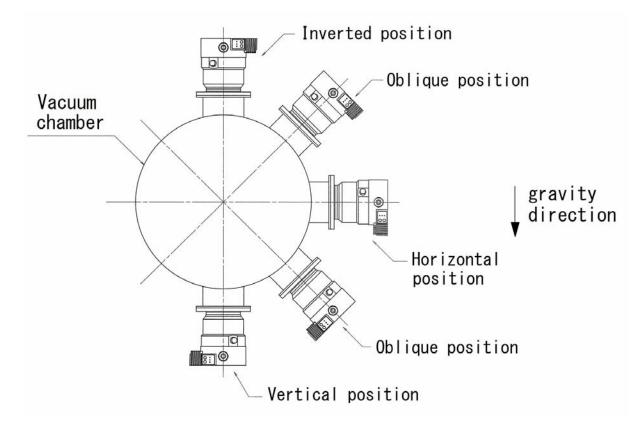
Mounting Direction of the Turbo Molecular Pump
